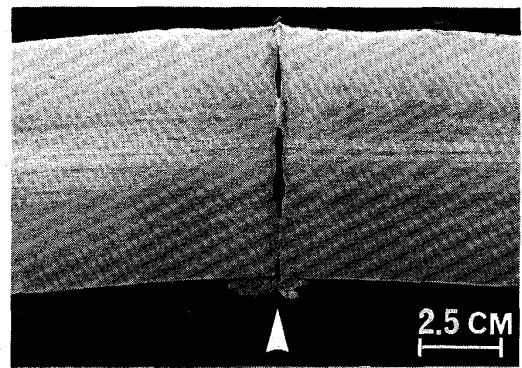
Crater on connecting plane just before upsetting in flash welded process. An arrow shows the inside of link.
